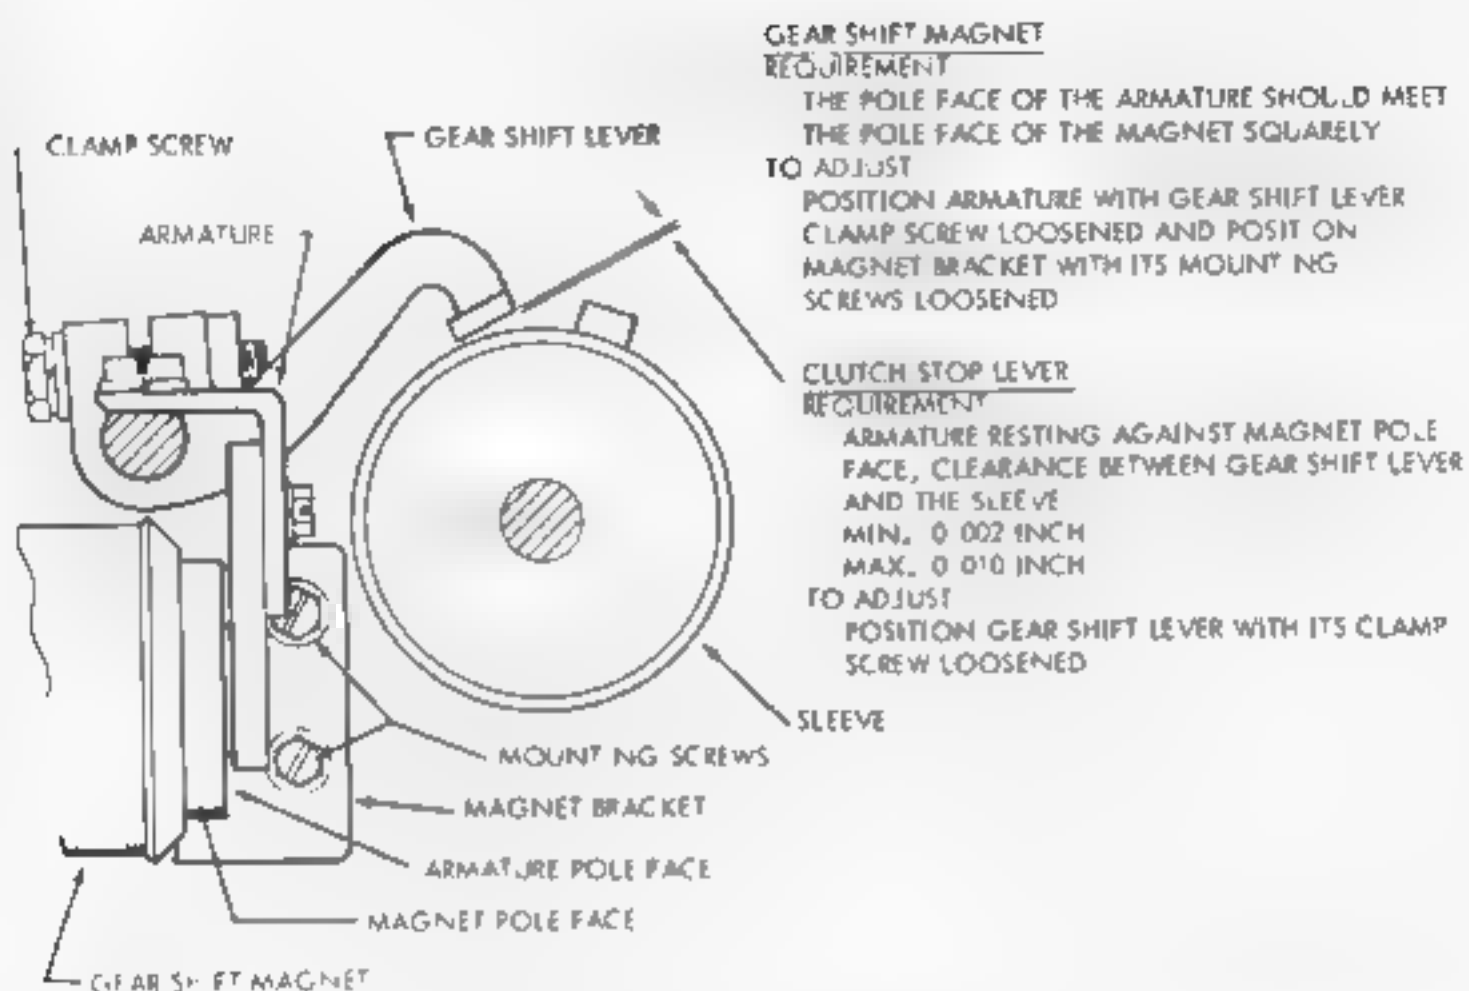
REMOTE CONTROL GEAR SHIFT MECHANISM
